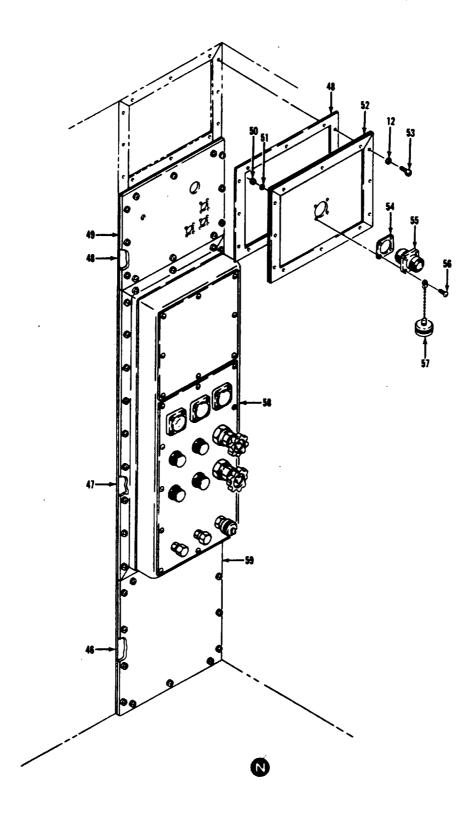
Electrical Equipment Installation (Sheet 6 of 19)
